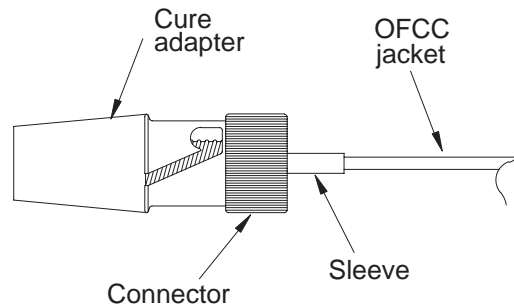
Sliding the Crimp Sleeve over the Connector Barrel
